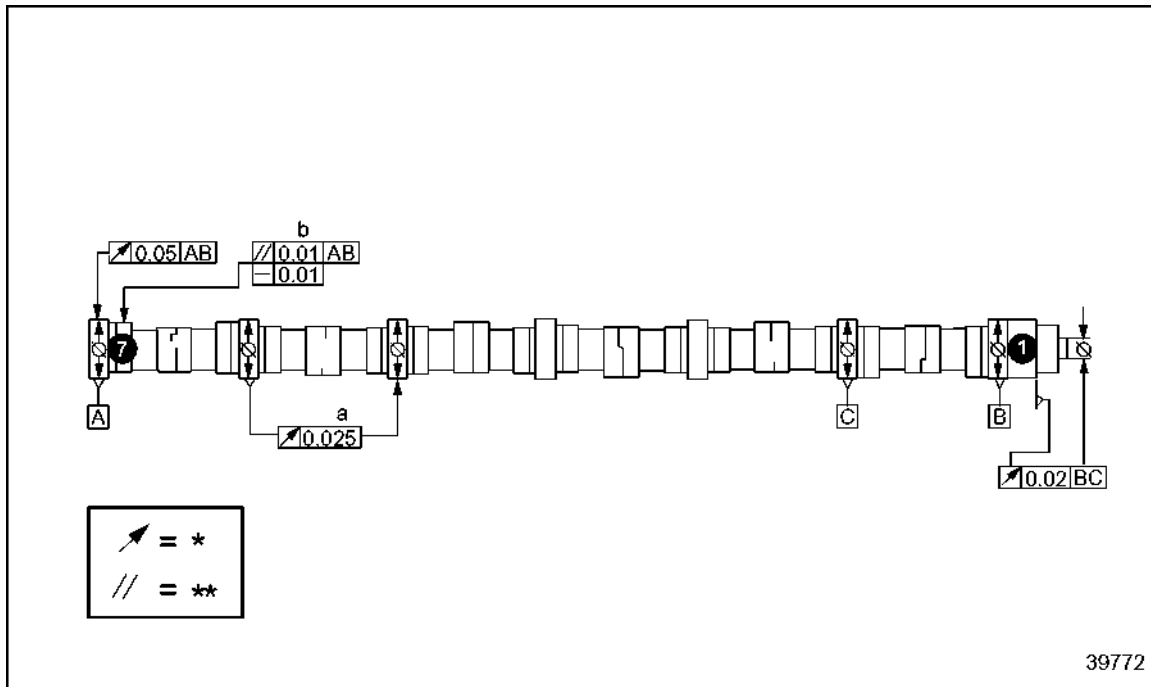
Coaxial Tolerances of Camshaft Bearings
